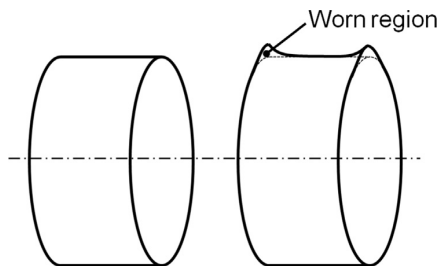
Sketched surface profile of a new bearing (left) and a worn bearing after the running-in process (right).
